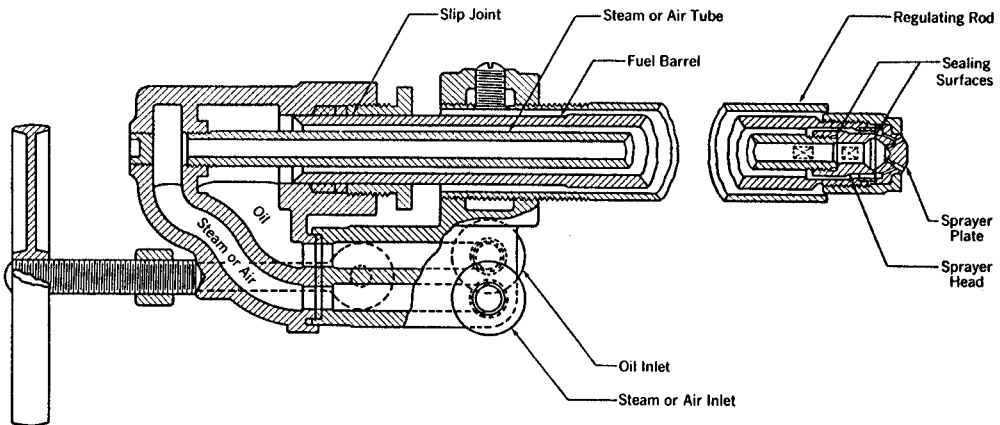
Steam (or Air) Oil Atomizer Assembly
